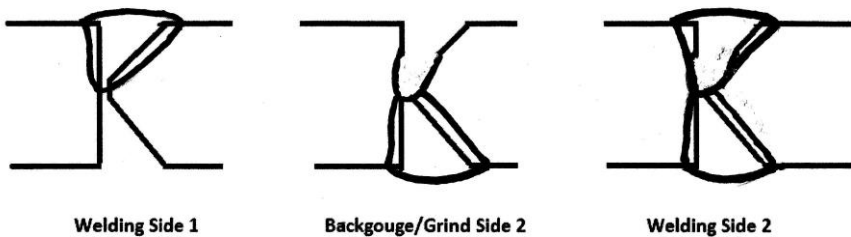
Welding Side 1 / Backgouge and Grind Side 2 / Welding Side 2
